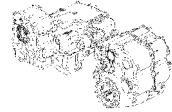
Replacement of the gearbox input shaft carrier seal
